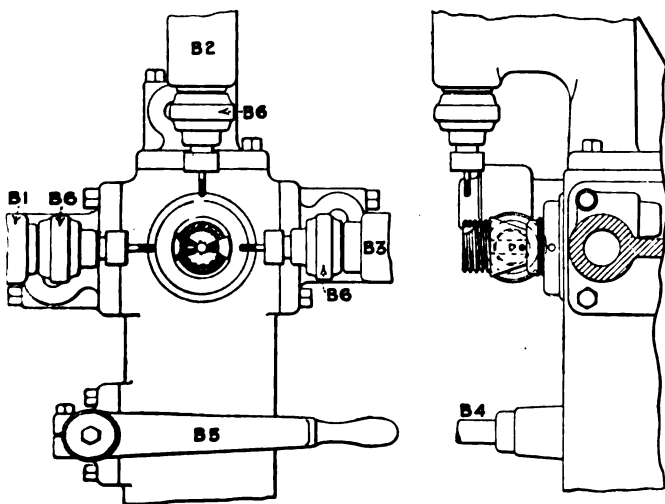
DETAILS OF THREE-SPINDLE TAPPER
